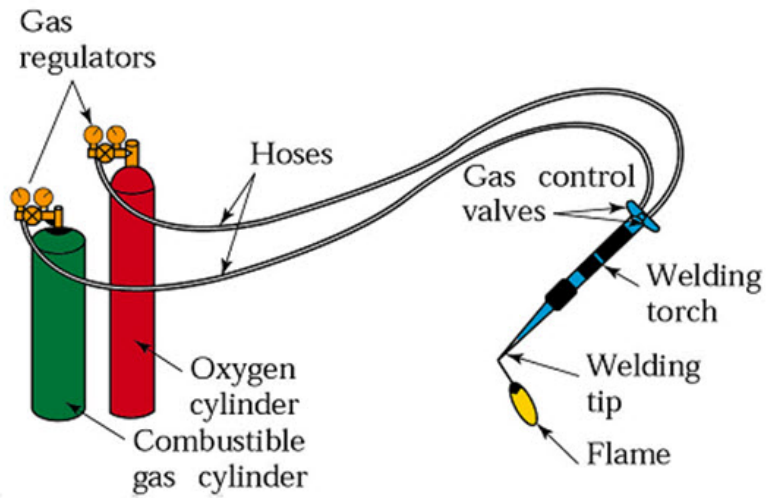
Basic equipment used in oxy fuel-gas welding. To ensure correct connections, all threads on acetylene fittings are left-handed, whereas those for oxygen are right-handed. Oxygen regulators are usually painted green, acetylene regulators red.
